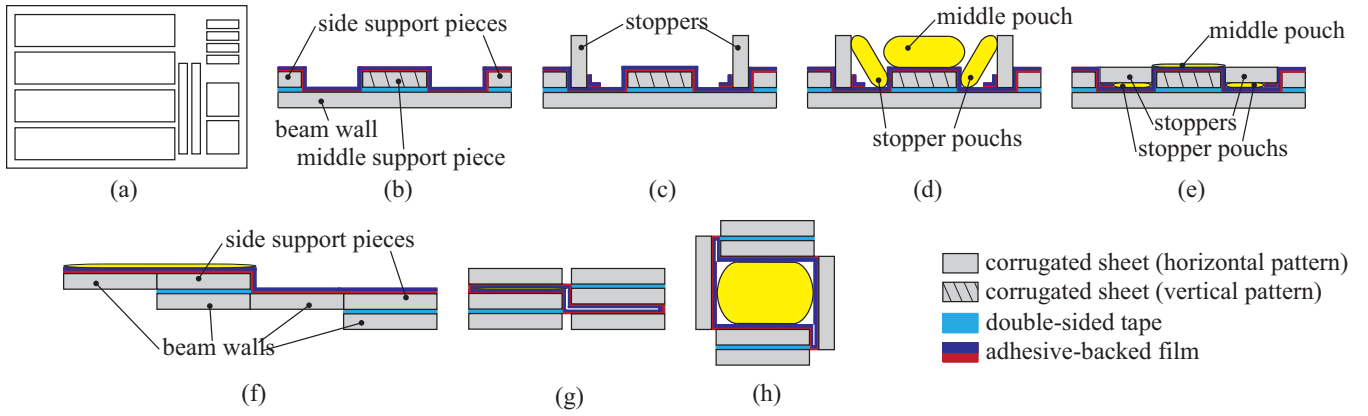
Fabrication steps for Design 1. (a) The structural panels are cut from a single sheet of corrugated plastic. (b) Each beam wall is assembled by hand (lengthwise view). (c) Stoppers are installed (lengthwise view). (d) Pouches are installed (lengthwise view). (e) Stoppers are folded down (lengthwise view). (f) Four beam walls are joined (axial view). (g) The beam is folded over and collapsed (axial view). (h) When inflated, the beam forms its desired shape (axial view).
